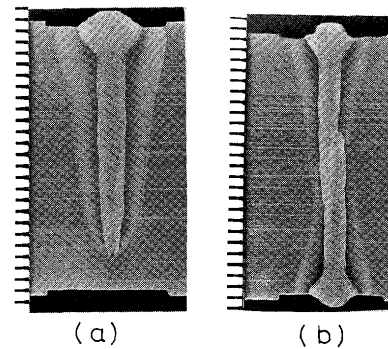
Macrophotographs of welds for HT—60 steel by use of low voltage type E·B welder.
